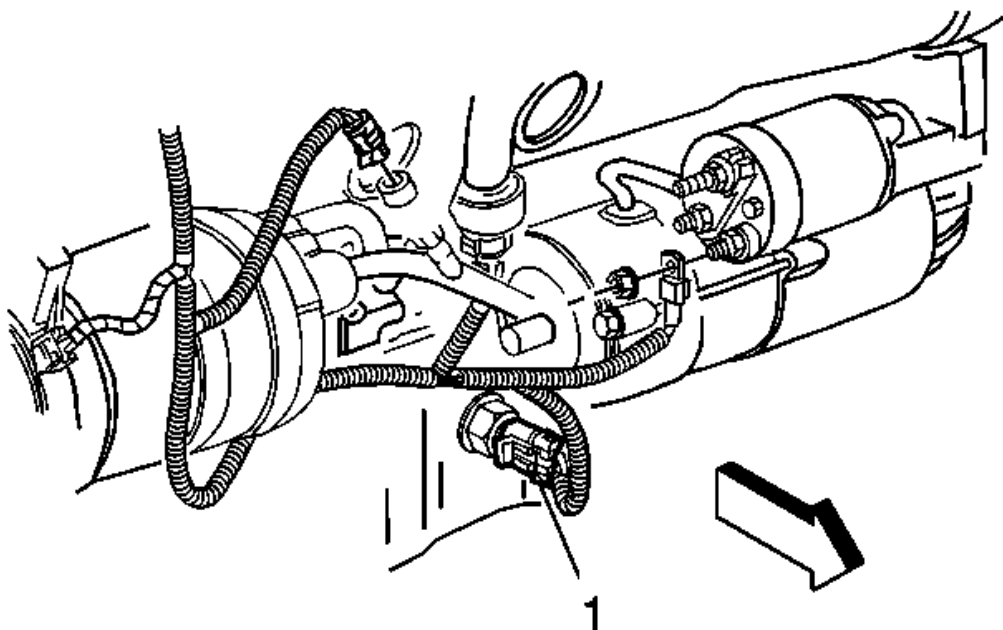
View of Engine Oil Level Sensor Electrical Connector
